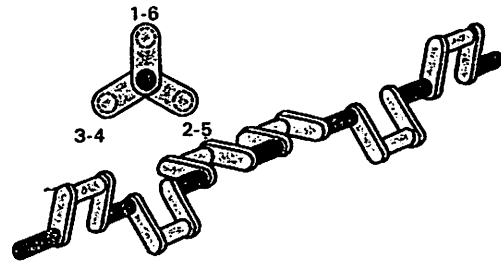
E. A left-hand crankshaft for a six cylinder engine will have No. 3 and 4 throws to the left of No. 1 and 6.
